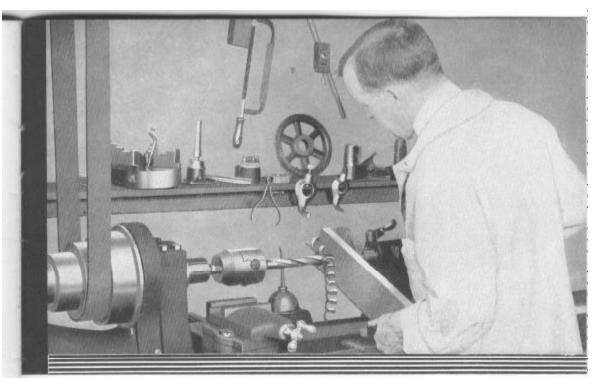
Drilling a Flat Piece of Steel in the Lathe.
